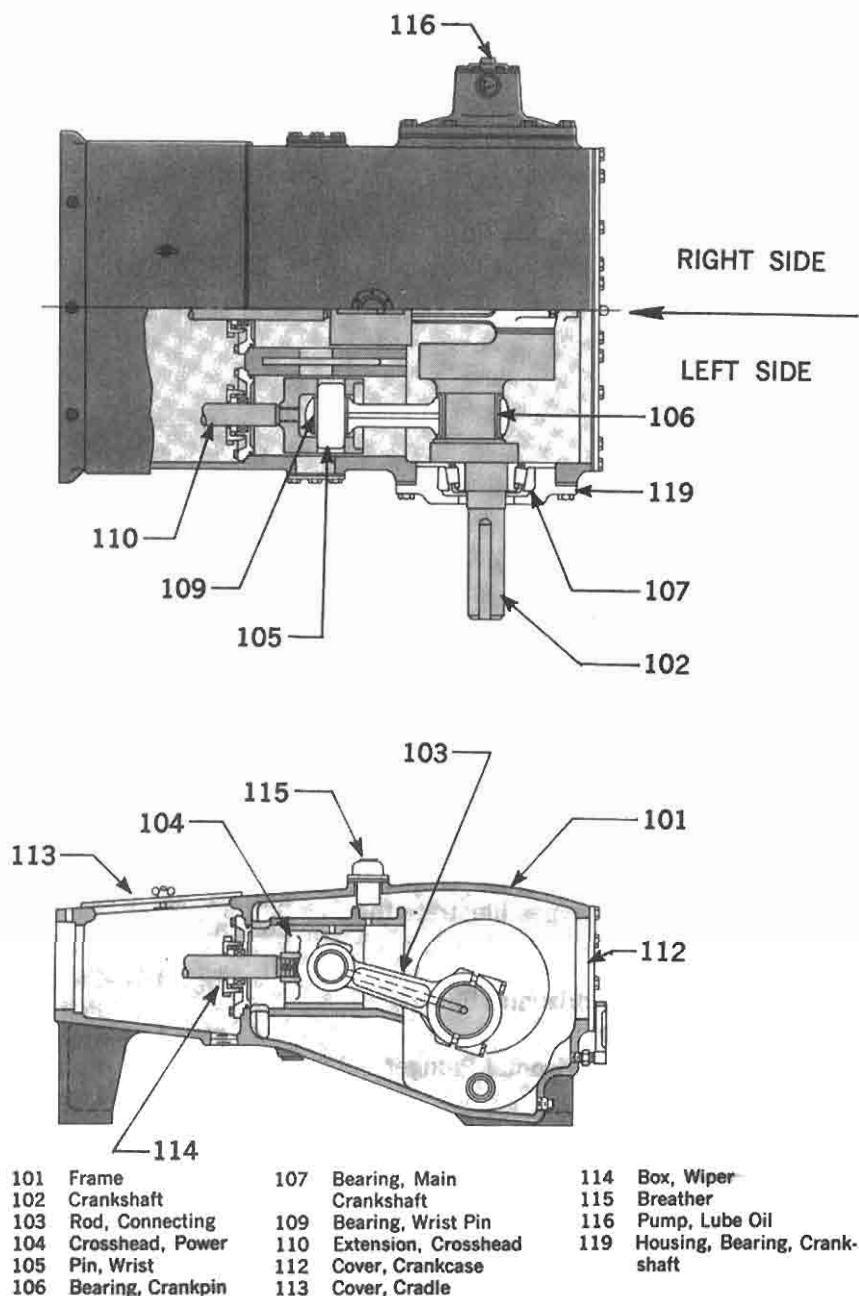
Bearing locations in a typical horizontal plunger pump (courtesy of Hydraulic Institute).
